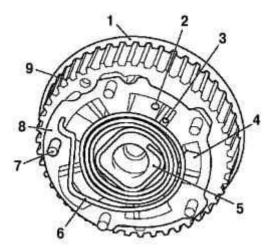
The regulator exhaust valve camshaft drive: 1 - separating disk (internal) - the regulator camshaft drive intake valves, 2 - channel fill and drain - the camera «A»; 3 - channel fill and drain - the camera «B»; 4 - separation chambers «A "and« B»; 5 - rotor is rigidly connected to the camshaft 6 - return spring, moves the stator to its original position in the absence of oil pressure; 7 - threaded pin - Lid regulator of camshaft 8 - stator can be moved hydraulically, 9 - pulley toothed belt
